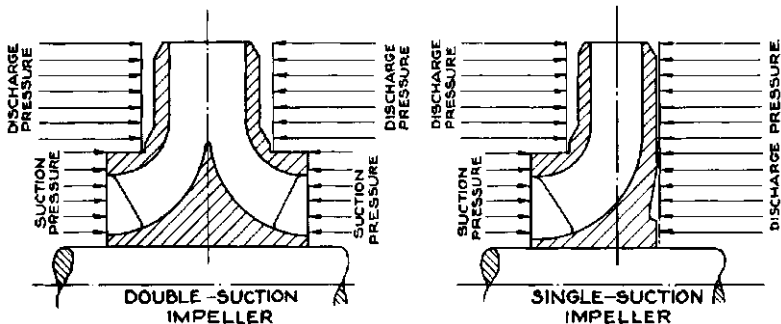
The origin of pressures acting on impeller shrouds to produce an axial thrust
